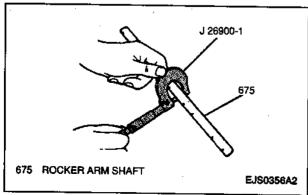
Measuring Rocker Arm Shaft Outside Diameter
